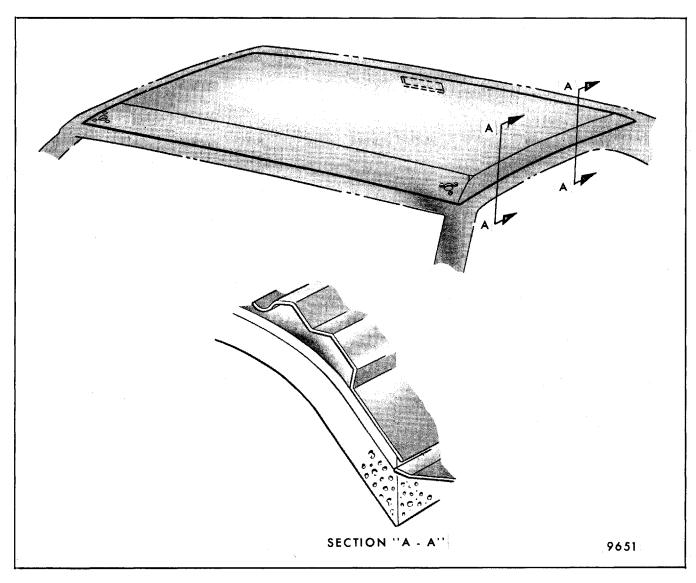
Formed Headlining Assembly A-80 Style
